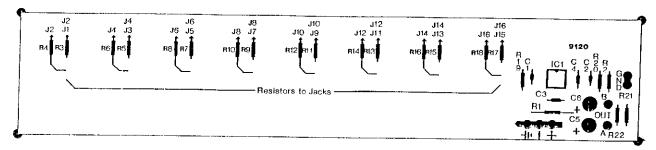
CIRCUIT BOARD PARTS PLACEMENT
